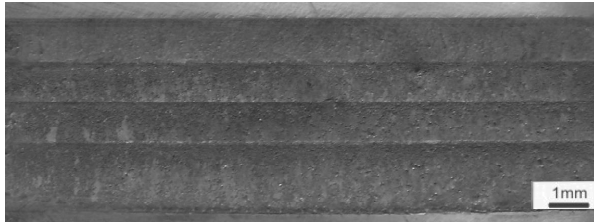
View of the MCMgAl6Zn1 casting magnesium alloy face of weld after laser treatment with TiC, scan rate: 0.75 m/min, laser power: 1.6 kW
